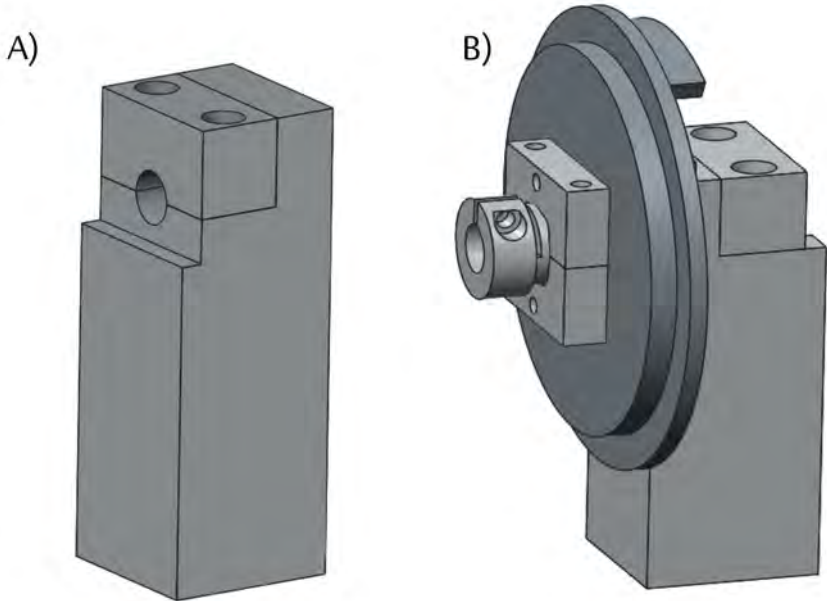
Sting arm clamp, where A) is the initial sting arm clamp, and B) is the updated sting arm clamp
